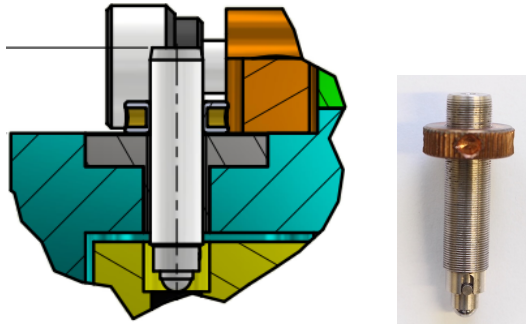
The fine adjustment screw on the BM jig [193]. Inside the screw is the inner fine threads, and the outside are the coarse threads. The bottom is a sphere tip, which moves up and down when the inner fine thread is turned.
